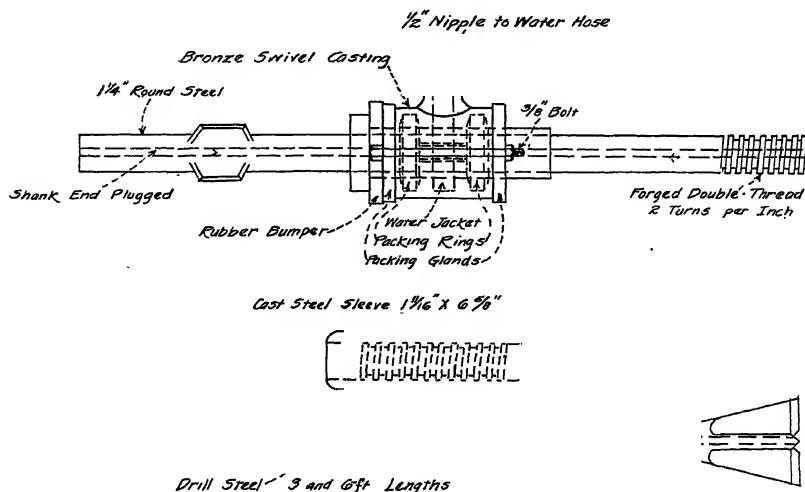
SWIVEL AND STEEL ASSEMBLY FOR DEEP-HOLE DRILLING WITH HAMMER DRILLS.
